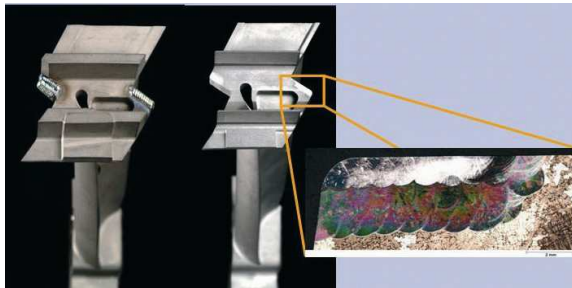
Stellite laser-clad low-pressure turbine blade after laser cladding (left) and in the finish-machined condition (right).
